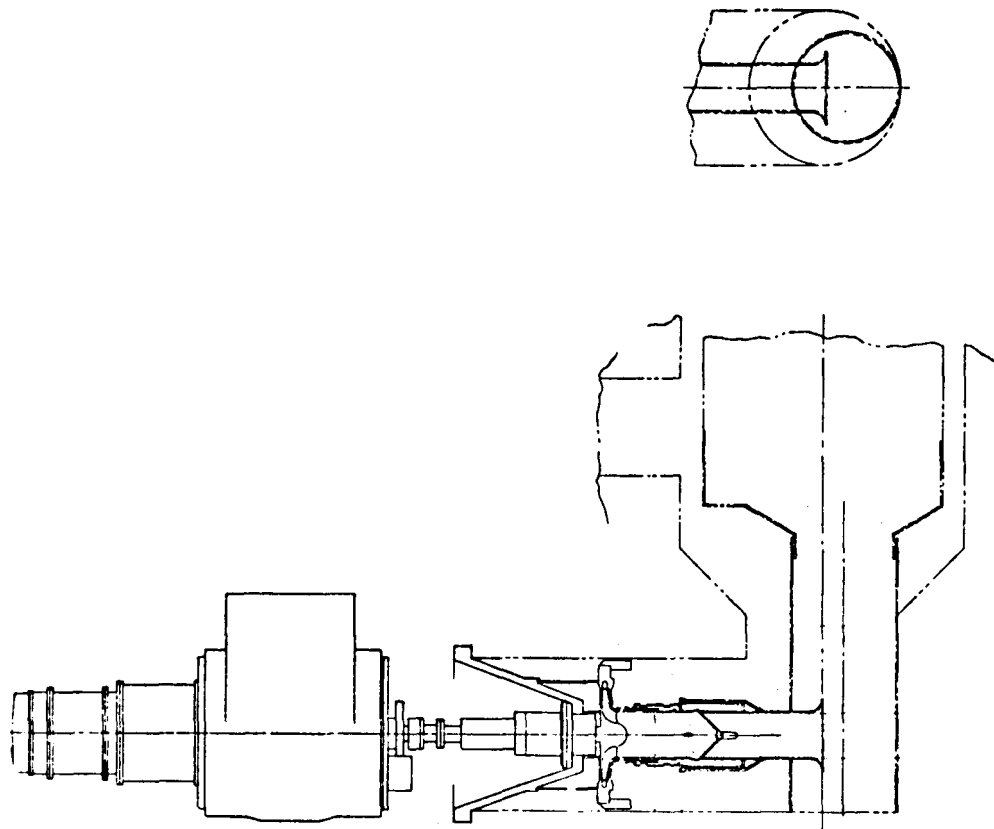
Inlet duct arrangement for GCFR main helium circulator in a horizontal installation
